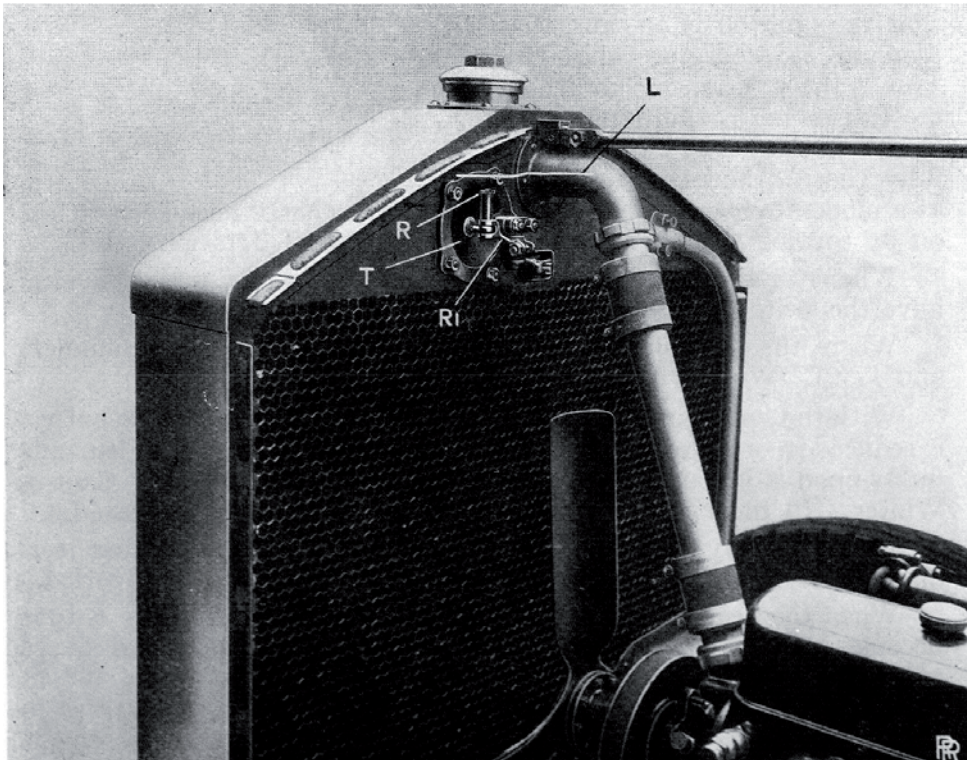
THERMOSTAT CONTROL OF RADIATOR SHUTTERS.
